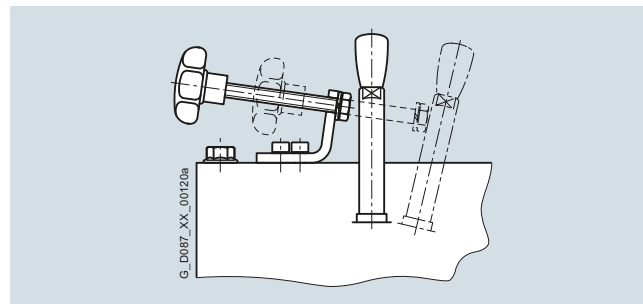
/40 Example of manual brake release lever with locking mechanism for brake L
